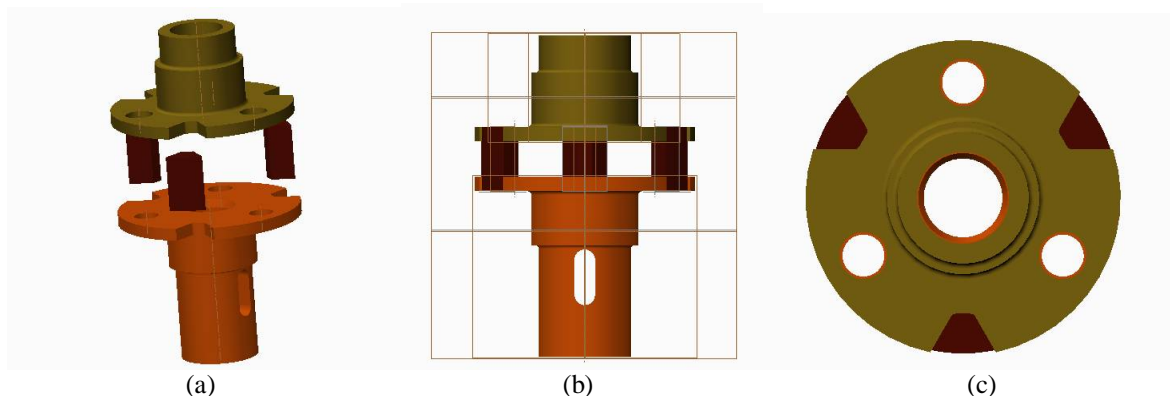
Creo model of planet carrier (a) exploded view (b) front view (c) top view
